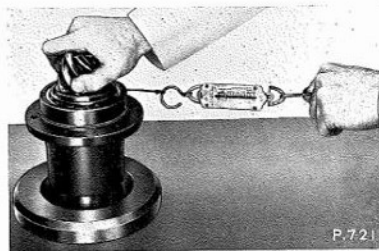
Checking the bevel pinion bearing preload, using a spring balance
